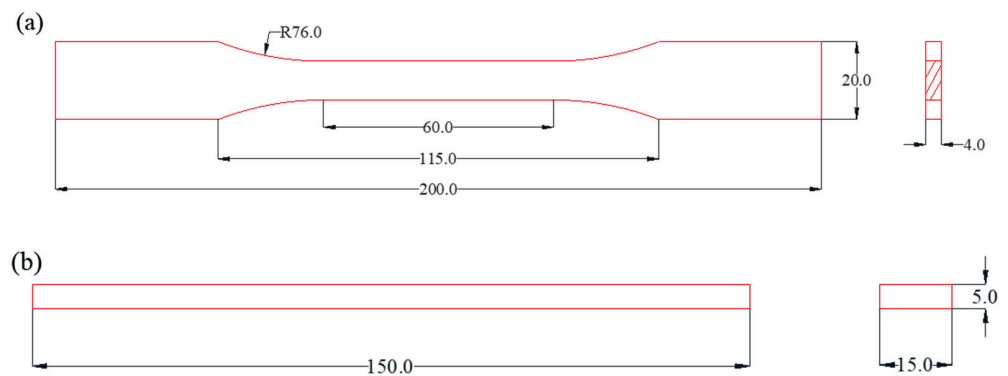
The geometric size of the specimen: (a) tensile test specimen, (b) bending test specimen.
